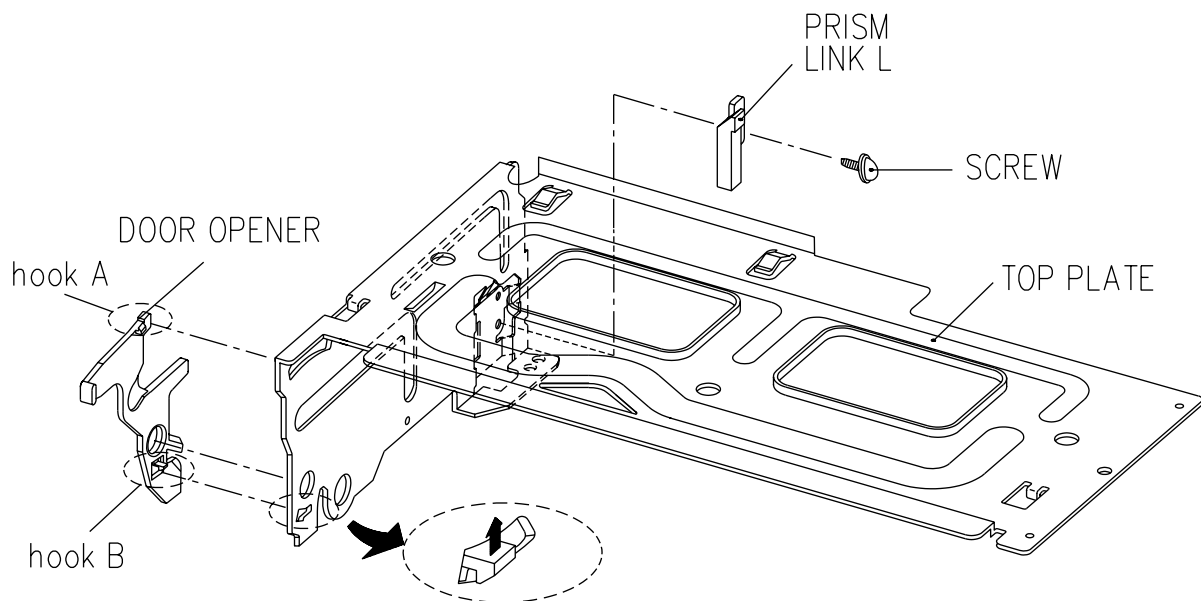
DISASSEMBLY OF THE TOP PLATE
